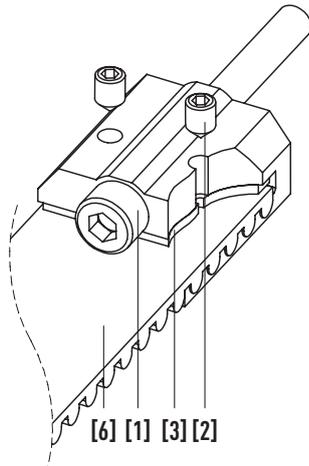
Installing the toothed belt in the belt tightener
